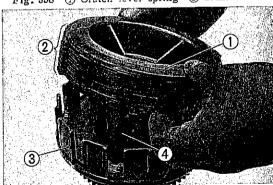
① Clutch center ② Friction discs and plates ③ Clutch outer ④ 25mm collar
